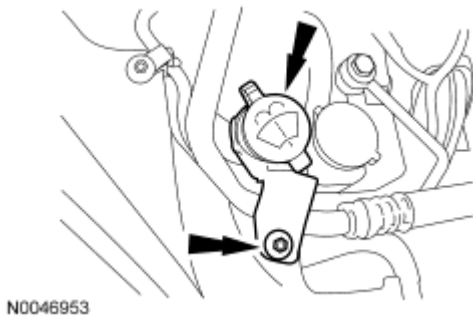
Locating Bolt And Windshield Washer Reservoir Filler Tube
